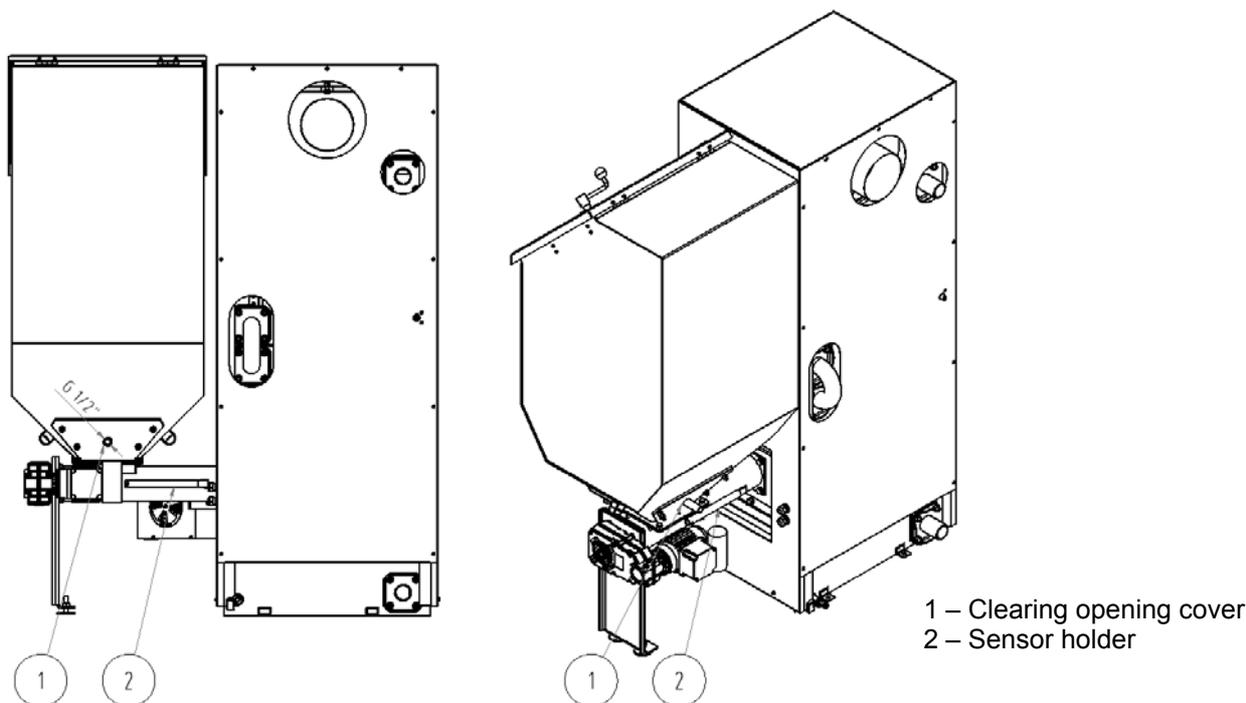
Assembly of the emergency fire extinguishing equipment
